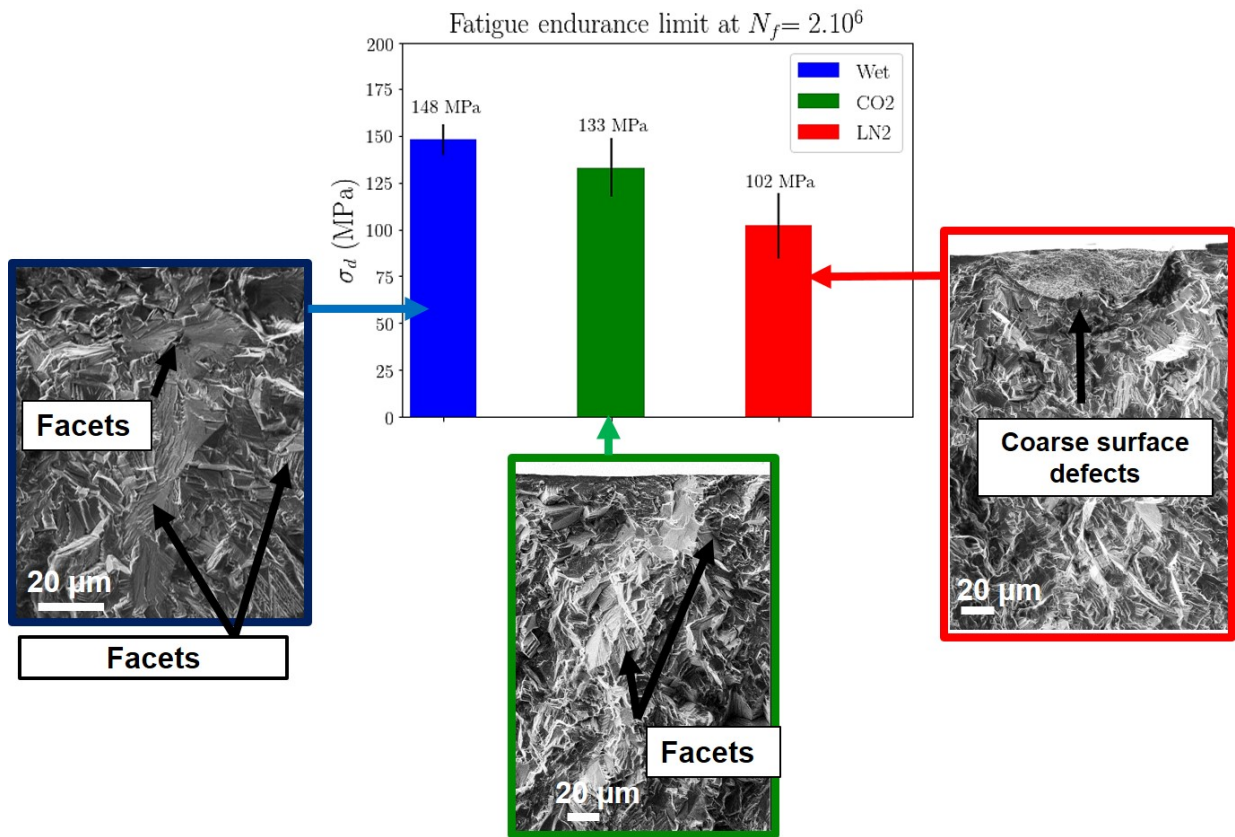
Illustration of the fatigue endurance limit obtained for the three fatigue batches linked with the fatigue failure mechanisms observed in the surface fracture.
